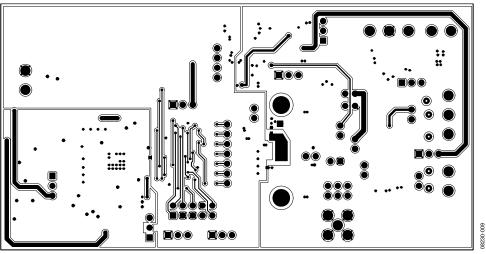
AD5422 TSSOP Evaluation Board Solder Side PCB
